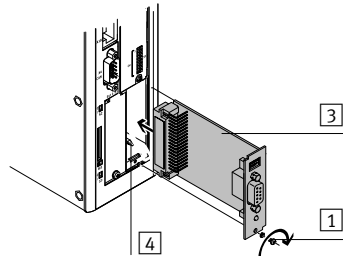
Mounting or dismantling (example CAMC-PB)
